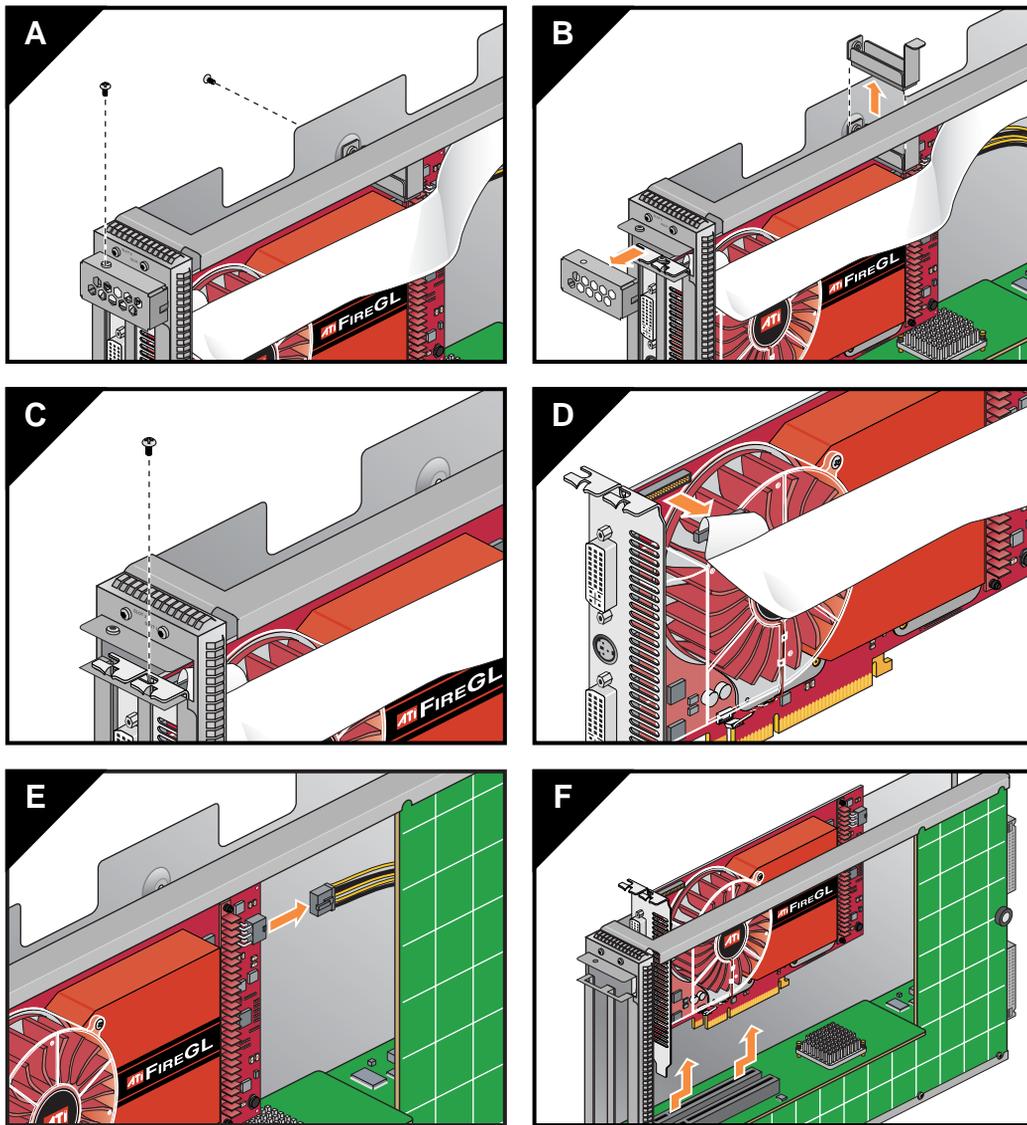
Single-Wide (I2E) 3D board Remove Example
